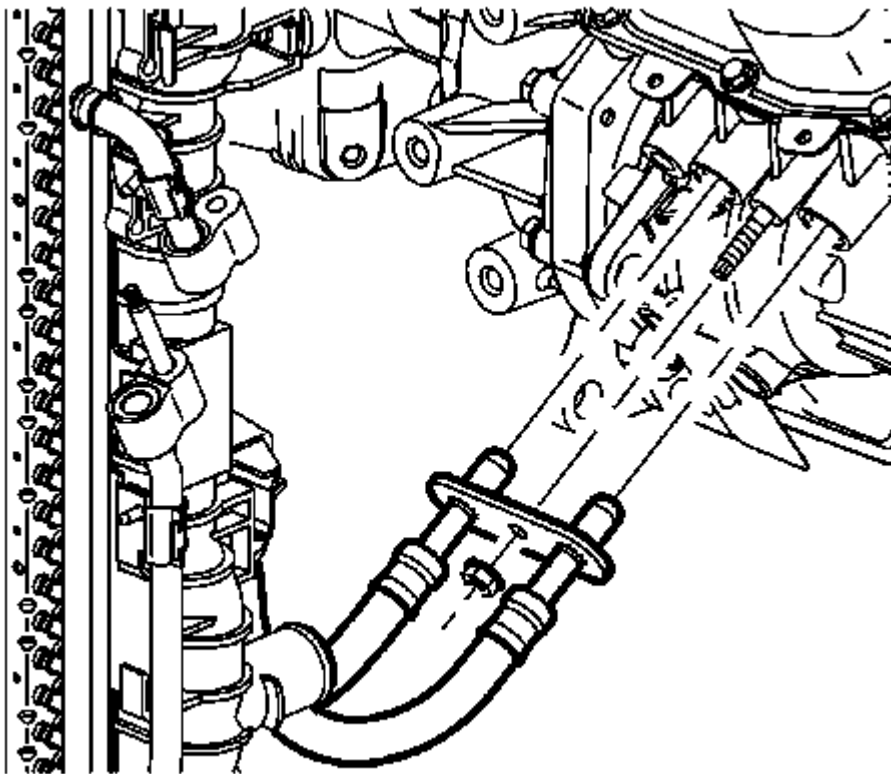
View Of Transaxle Oil Cooler Line Assembly
